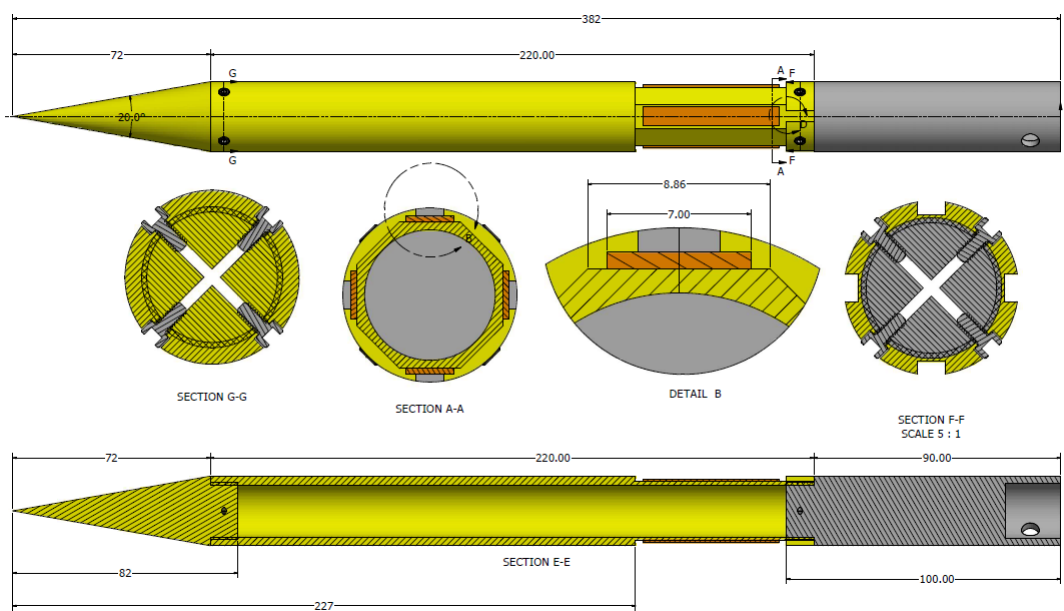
Circular probe detail drawing (all dimensions are in mm)
